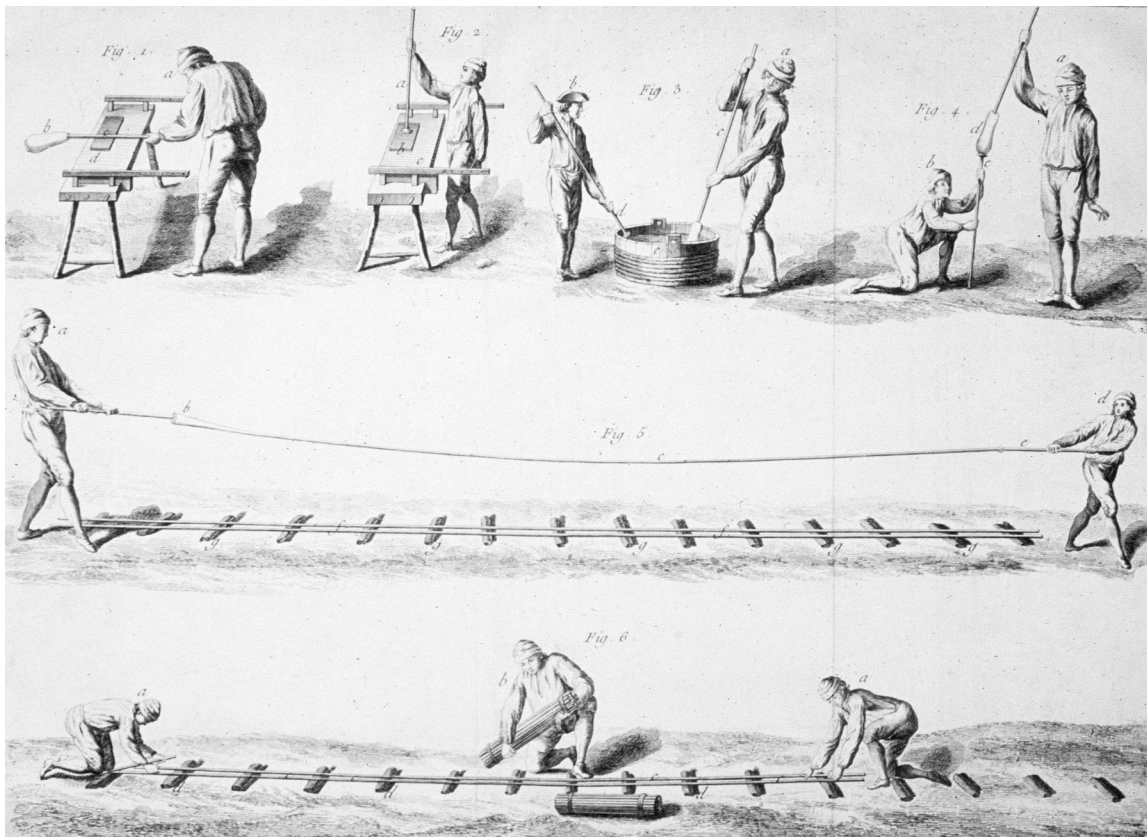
Drawing glass tubes: *Verrerie en bois, Différentes Opérations pour filer les Tubes des Barometres, pour les couper &c. &c.* (Diderot and d'Alembert 1772, 10: Plate XXI).
